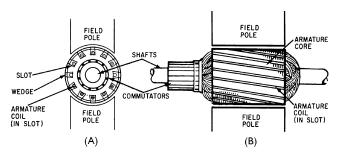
Drum-type armature: (A) end view (cross section); (B) side view.
